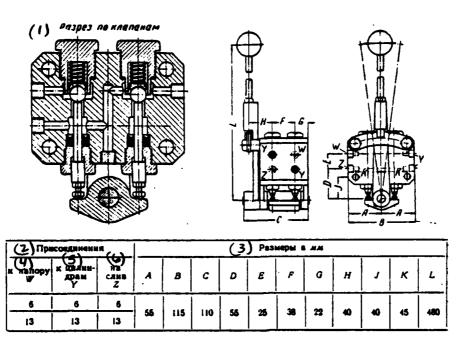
Construction/design and the basic dimensions of distributor with ball valves.
